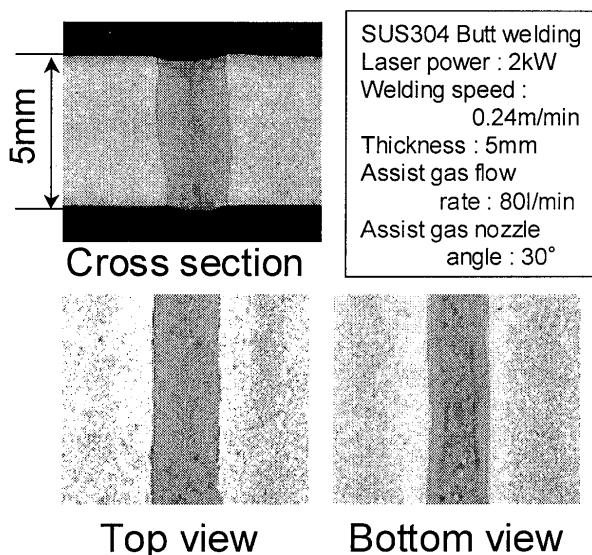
Butt welding bead of 5mm thick steel plate
